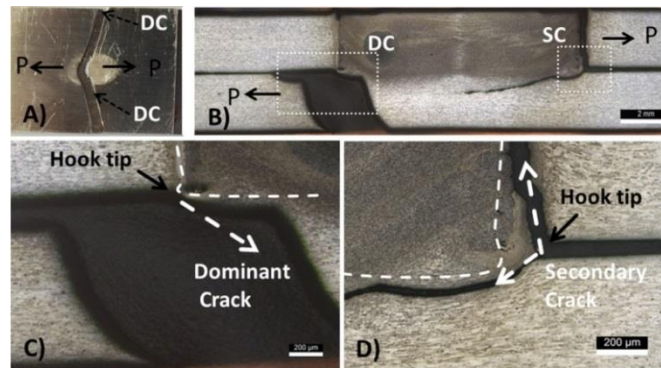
Crack propagation for TS-LP, specimen loaded at 13.375 MPa or 30% of the ULSS: A) Overview of the fracture; B) Cross-section of the spot weld shows the location of the dominant crack (DC) and secondary crack (SC); C) Magnified view of the hook interface and DC; D) Magnified view of the hook interface and secondary crack.
